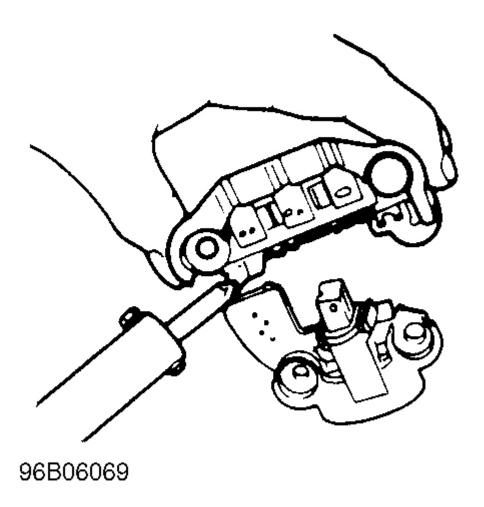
Unsoldering Rectifier From Regulator Courtesy of MAZDA MOTORS CORP.
